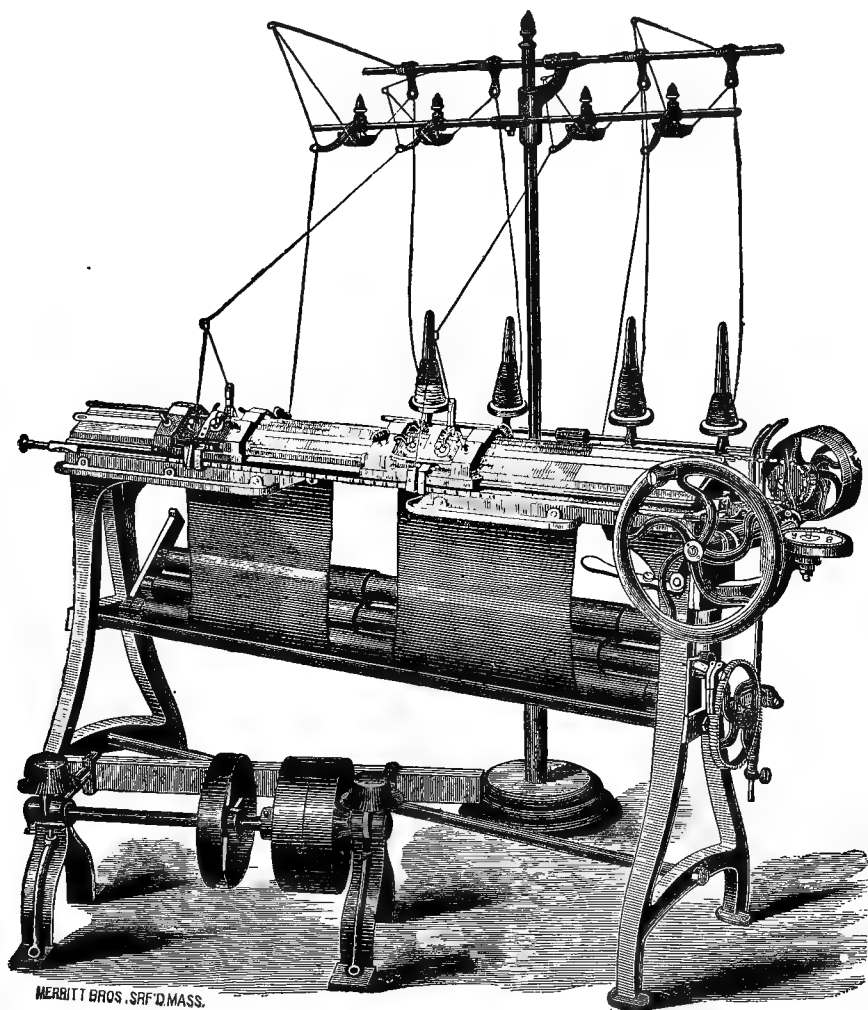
Lamb power Cardigan jacket knitting machine.
